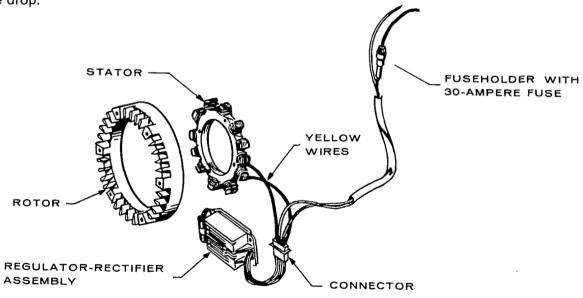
FLYWHEEL ALTERNATOR (BEGINNING WITH SPEC T)
